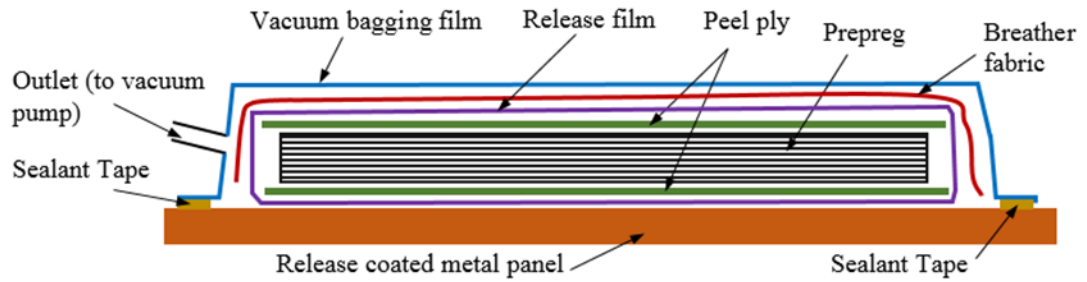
Prepreg moulding showing the vacuum bag, sealant, outlet to vacuum pump and the preform surrounded by peel ply
